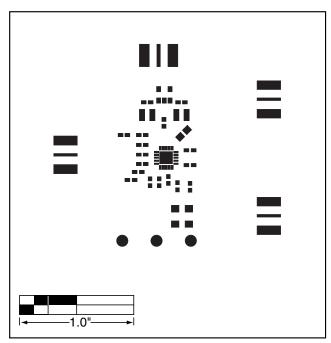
MAX9993 EV Kit PC Board Layout—Top Soldermask
